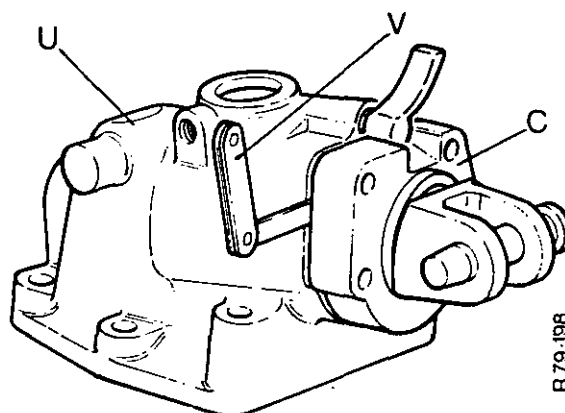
MEASURING THE DISTANCE BETWEEN THE END COVER AND THE HOUSING
